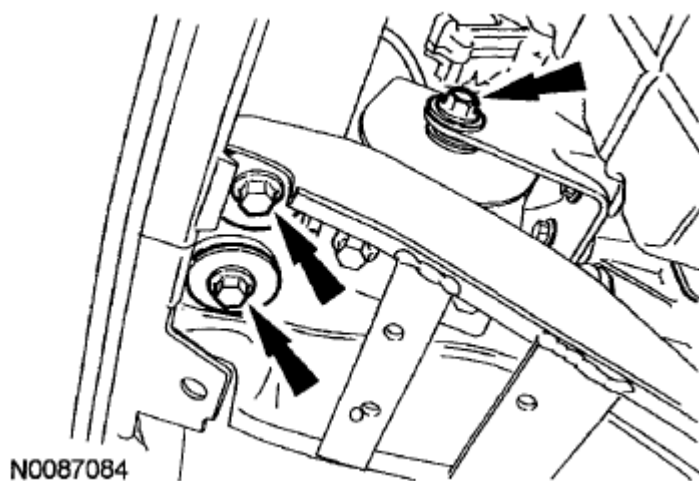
Locating Front Roll Restrictor Bolt And Bolts
